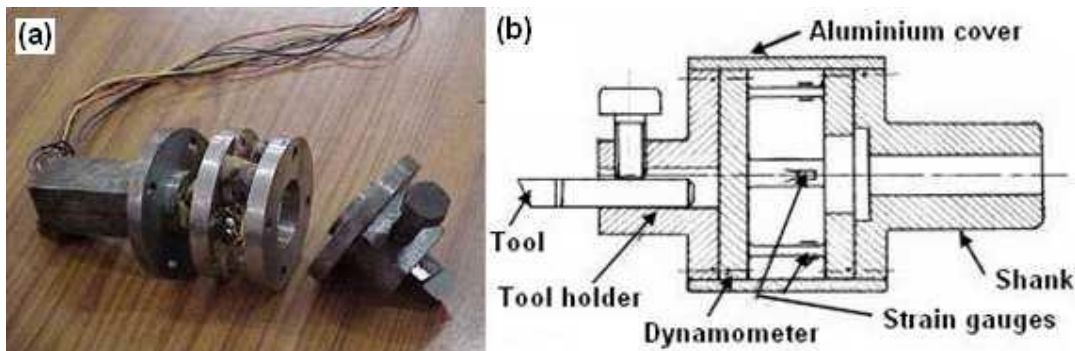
(c) Photographic view of a strain gauge type 2D turning dynamometer
